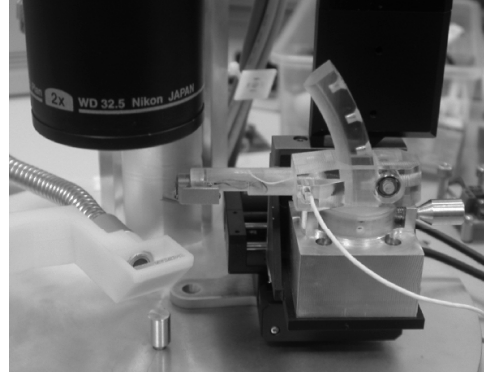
Microgripper mounted on linear stages in assembly workspace
